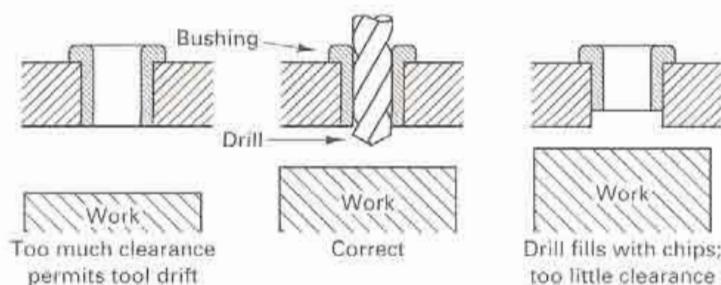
Proper clearance between drill bushing and tool of workpiece is important.
